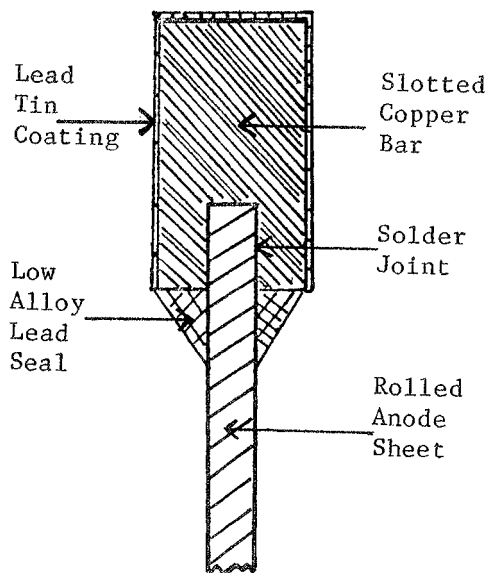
Cross section of copper bar-sheet attachment for rolled sheet anode.
